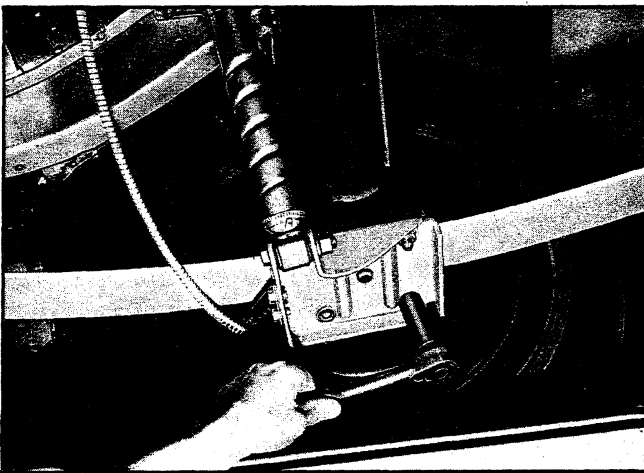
Removing Lower Pad Bracket (Chevy II)
